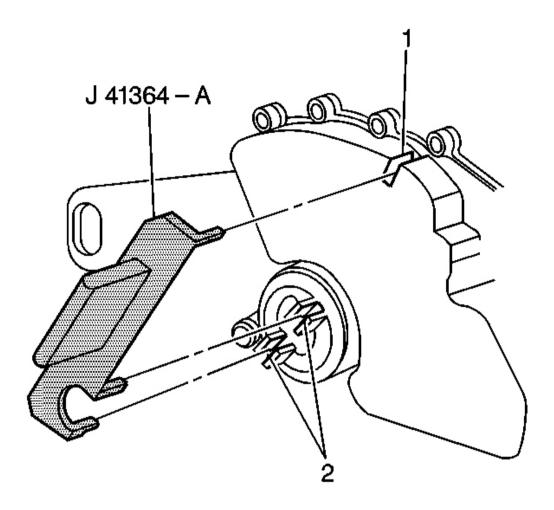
J 41364-A & Park/Neutral Position Switch Courtesy of GENERAL MOTORS CORP.
